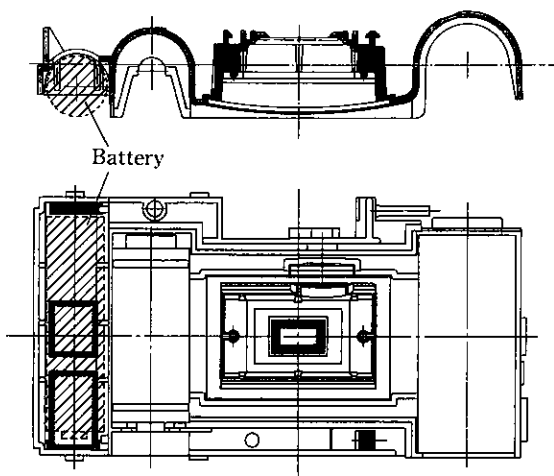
Cross section and rear view of the MiNi showing the electric component layout
